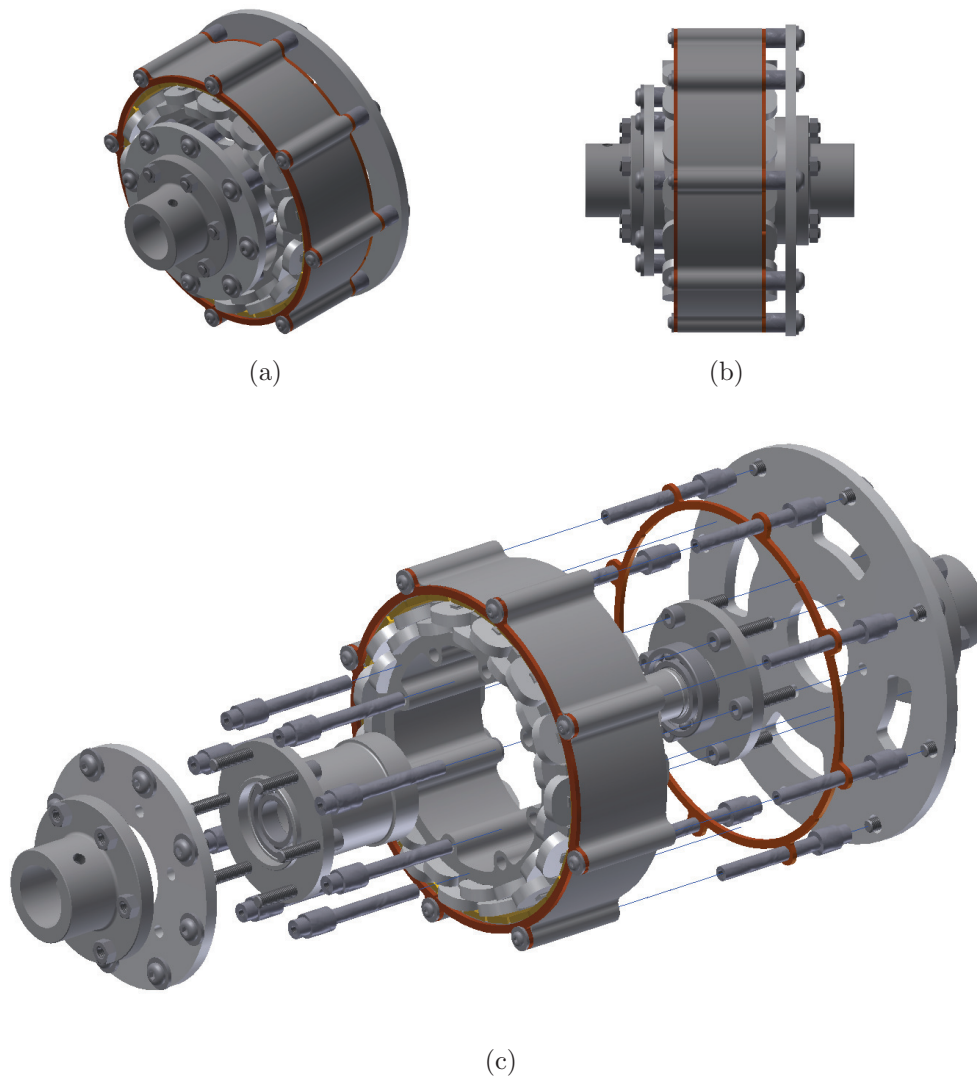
A CAD representation of the final assembly of the slip coupler, including all mounting fixtures. An exploded view is also given in (c).
